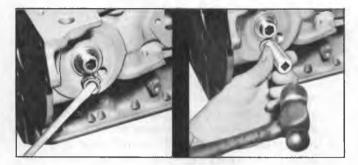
Oil Filter By-Pass Valve (In-Line)
